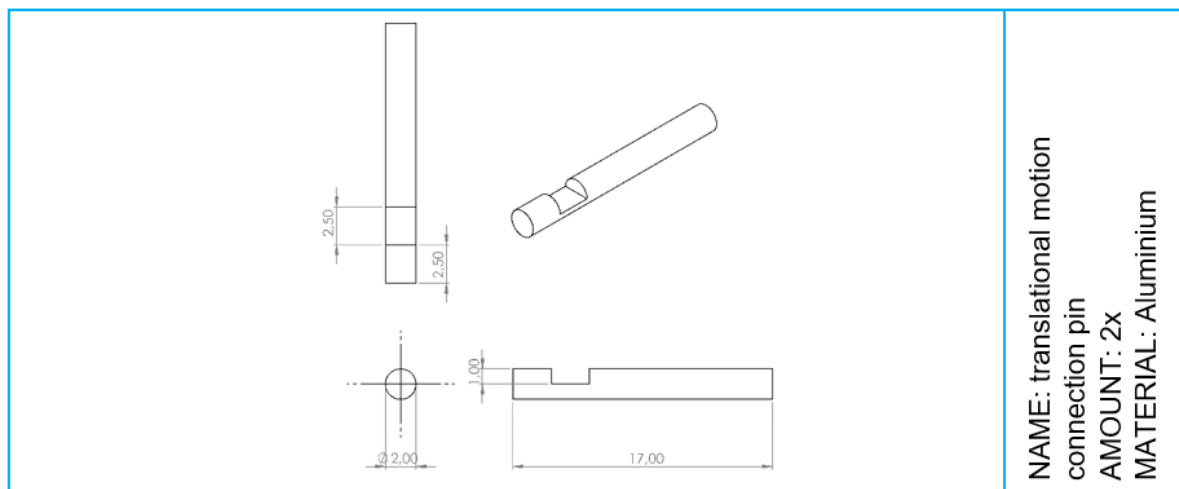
Construction drawings of the connection pin connecting the two translational motion parts - Machined prototype
